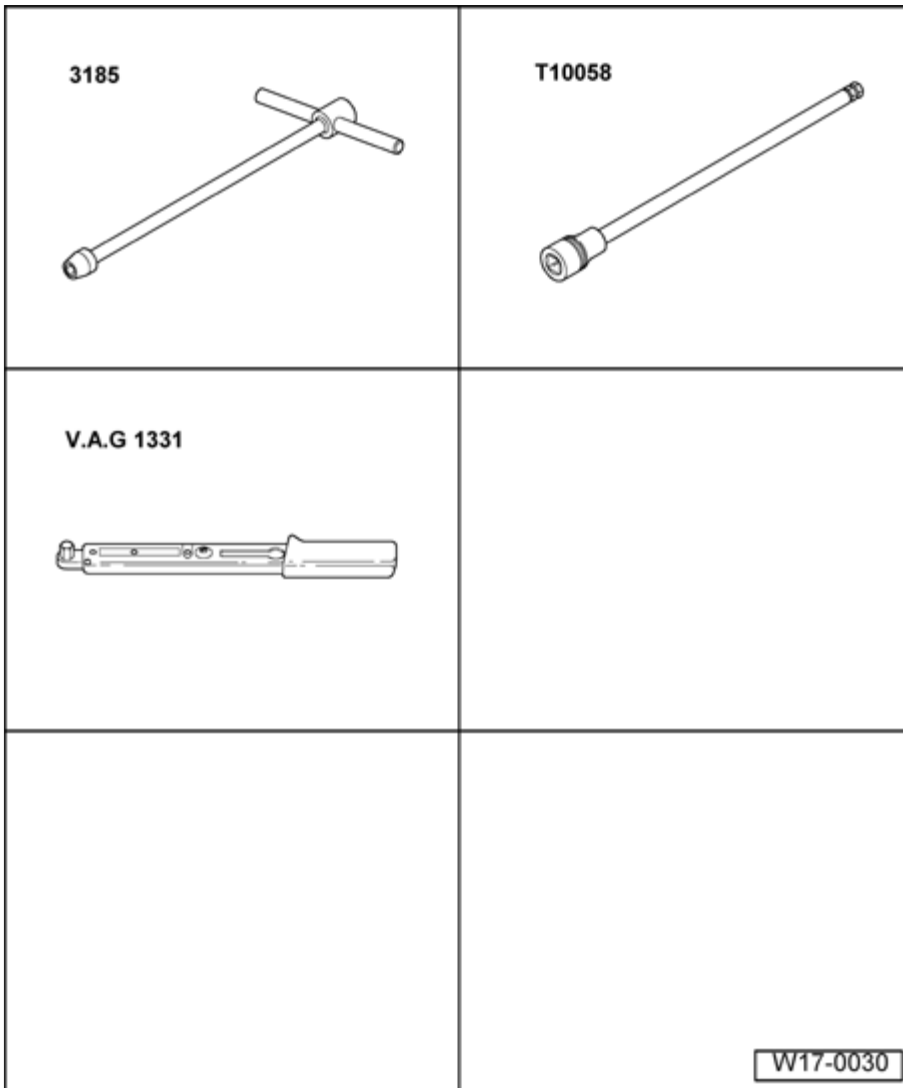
Identifying Special Tools - Oil Pan, Removing And Installing
